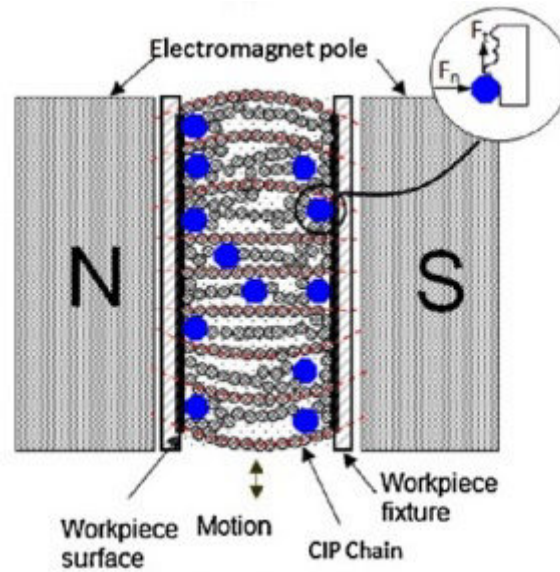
Polishing contact zone, between the MR-fluid and the workpiece. [14].
